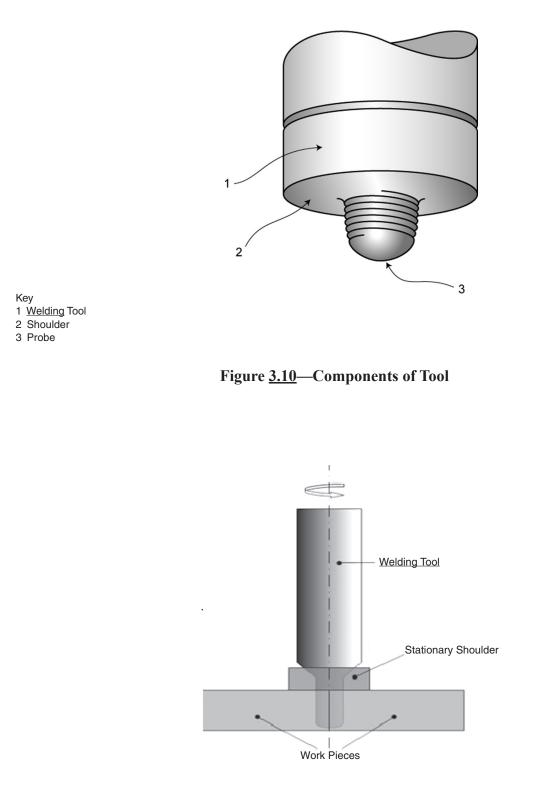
Stationary Shoulder Friction Stir Welding (SSFSW)
